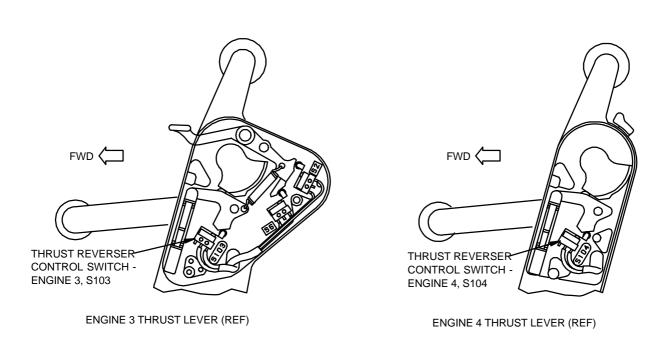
78-00 Exhaust Component Location Fig. 102 (Sheet 9)
